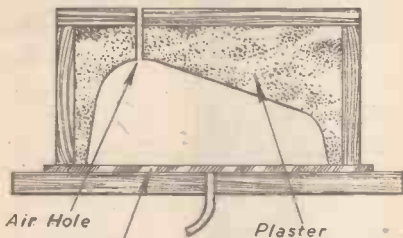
Showing mould box clamped in position on blowing board, and a section through mould box.
